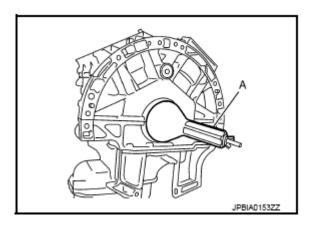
Pressing To Fit Height Of Rear Oil Seal Using Drift Courtesy of NISSAN NORTH AMERICA, INC.
